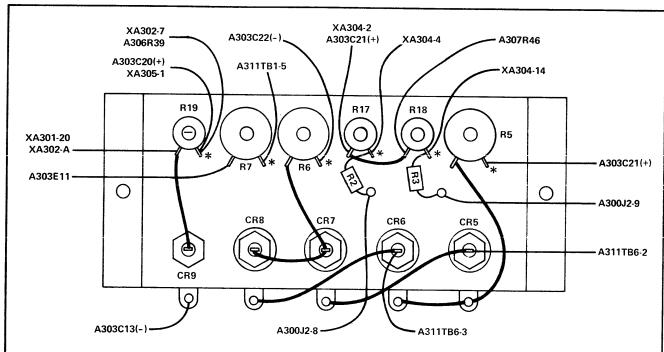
A307 Component Board Assembly, Parts Location and Connection Diagram
